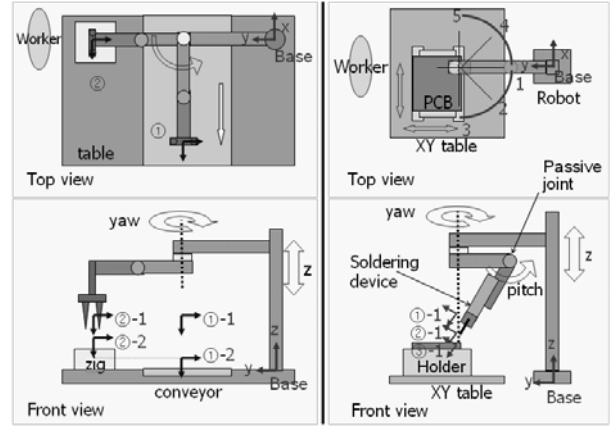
Schematic diagram of robot arm: Left -Test Circuit test of PCB, Right-Soldering inspection and repairing of PCB.
